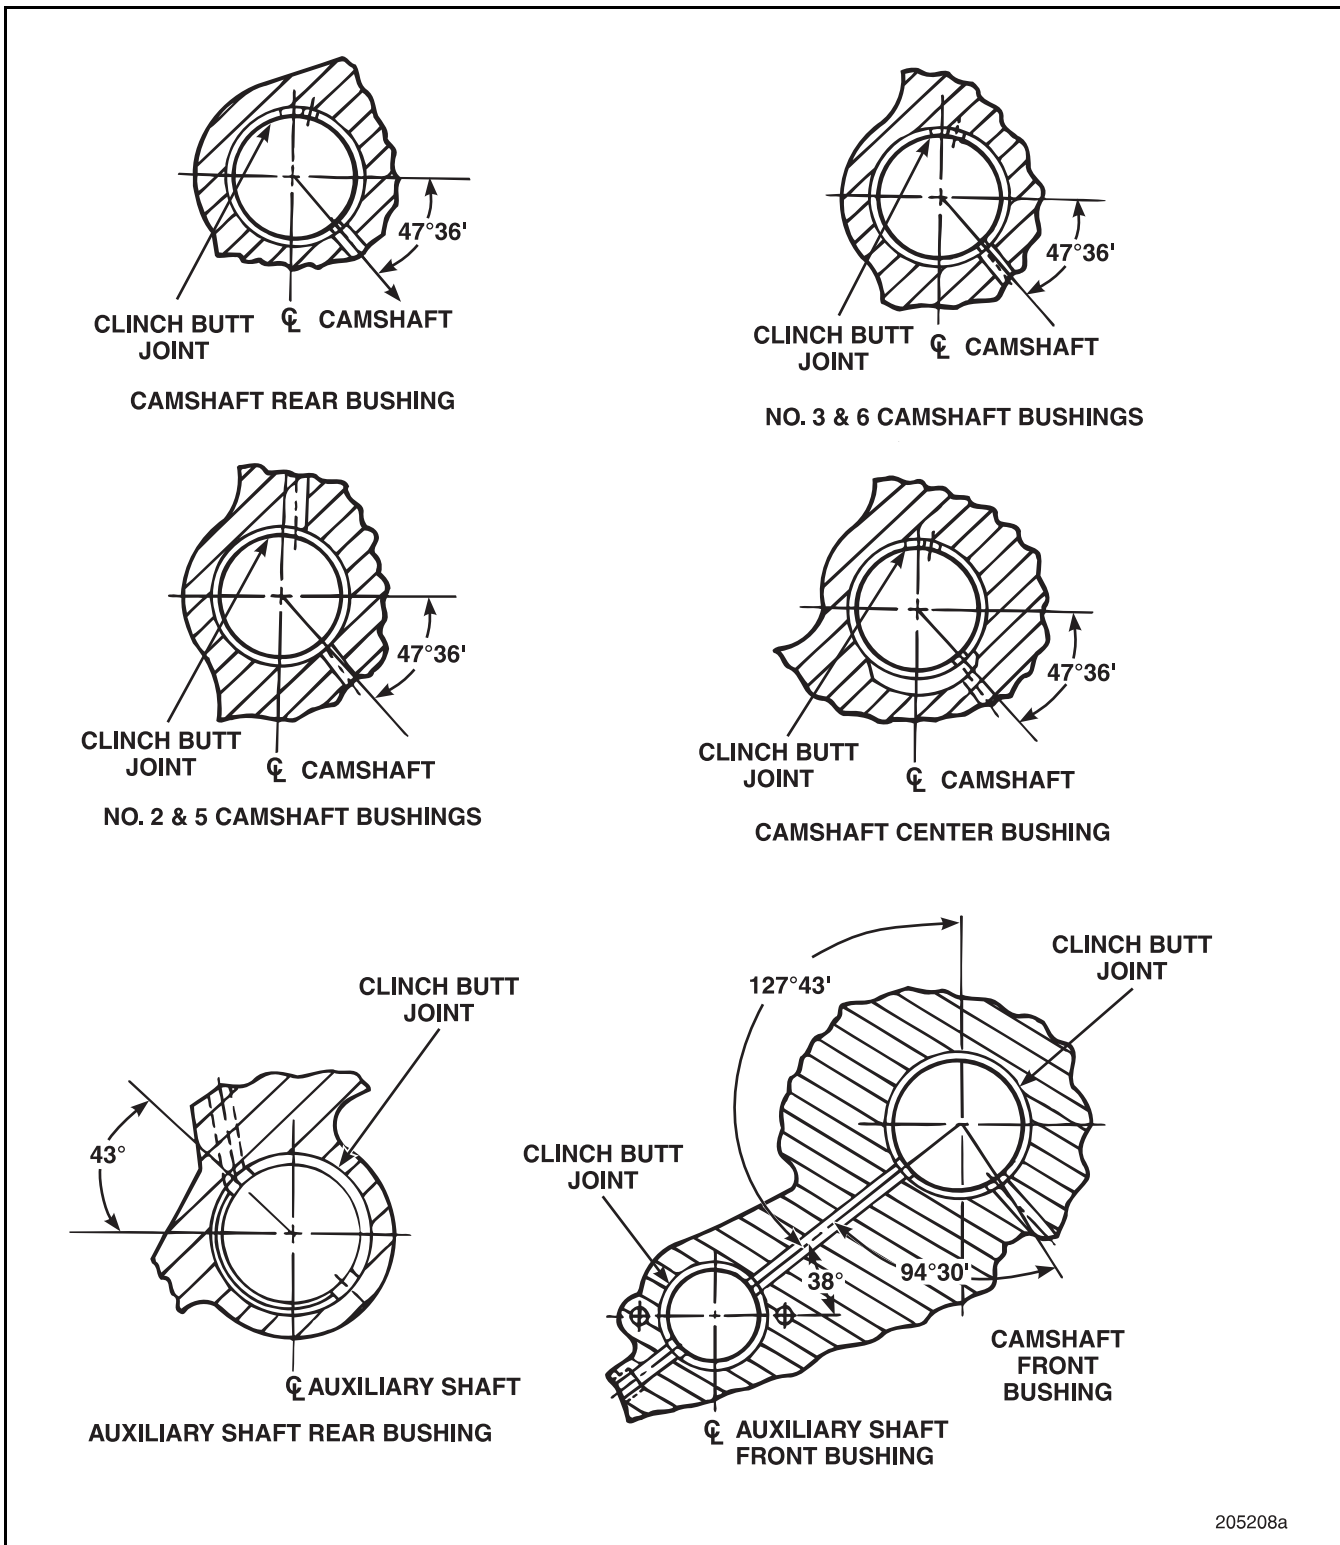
Camshaft and Auxiliary Shaft Bushing Alignment
